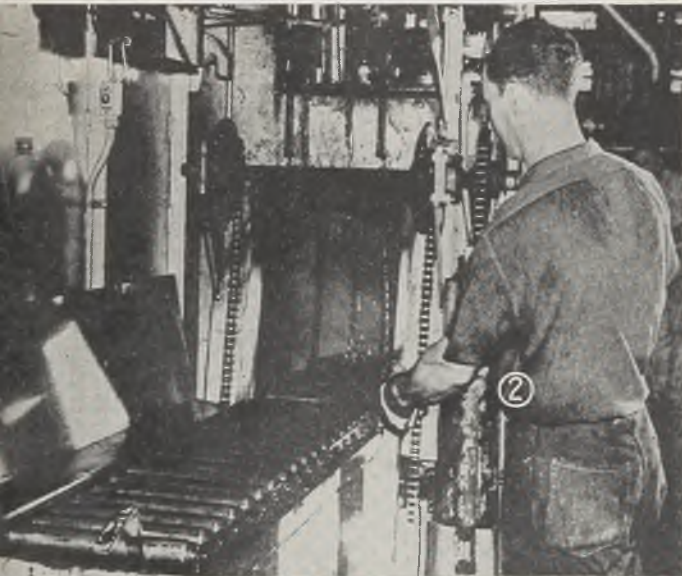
Exit end of the pusher-type furnace shown in Fig. 5. Quenching elevator has just returned to level of the unloading conveyor
